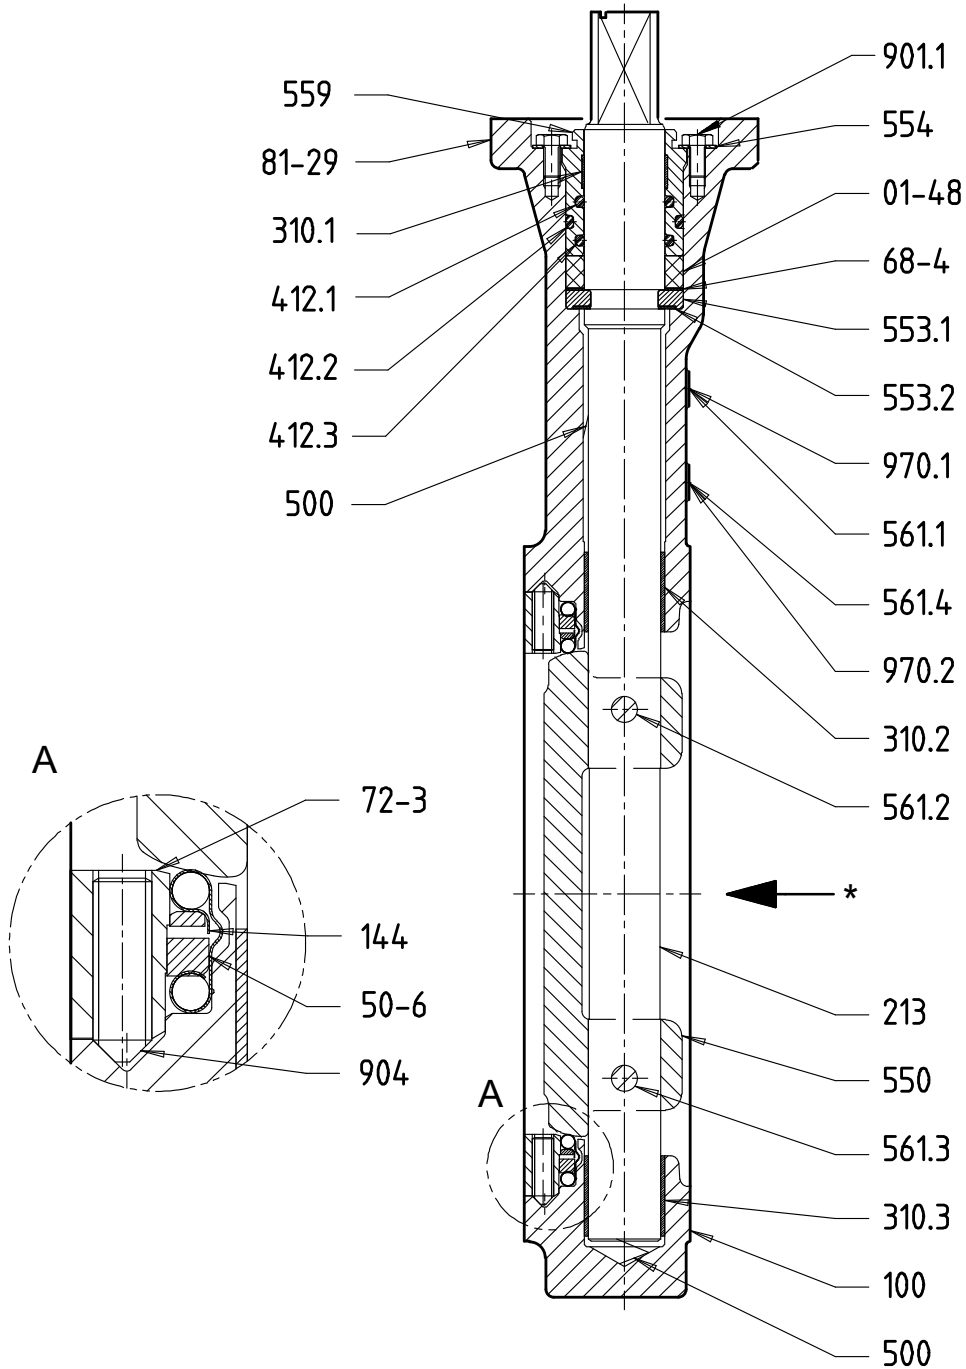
Sectional drawing of TRIODIS 150 MT T1 - DN 50-150 (2-6 inch)
